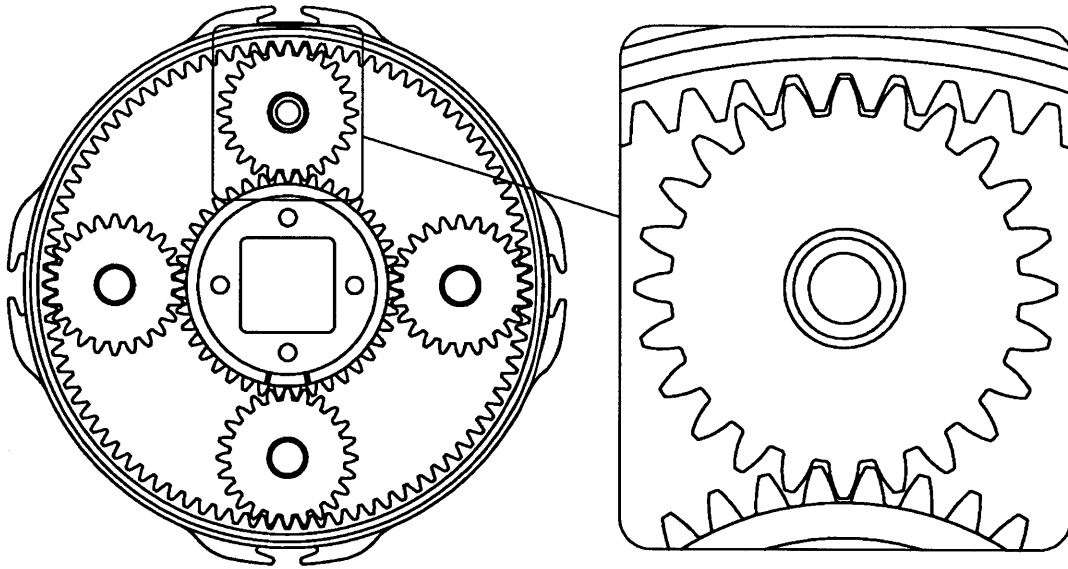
Planetary gearbox, shown full scale, with detail 3:1 view showing the involute gear interfaces associated with a single planet.
